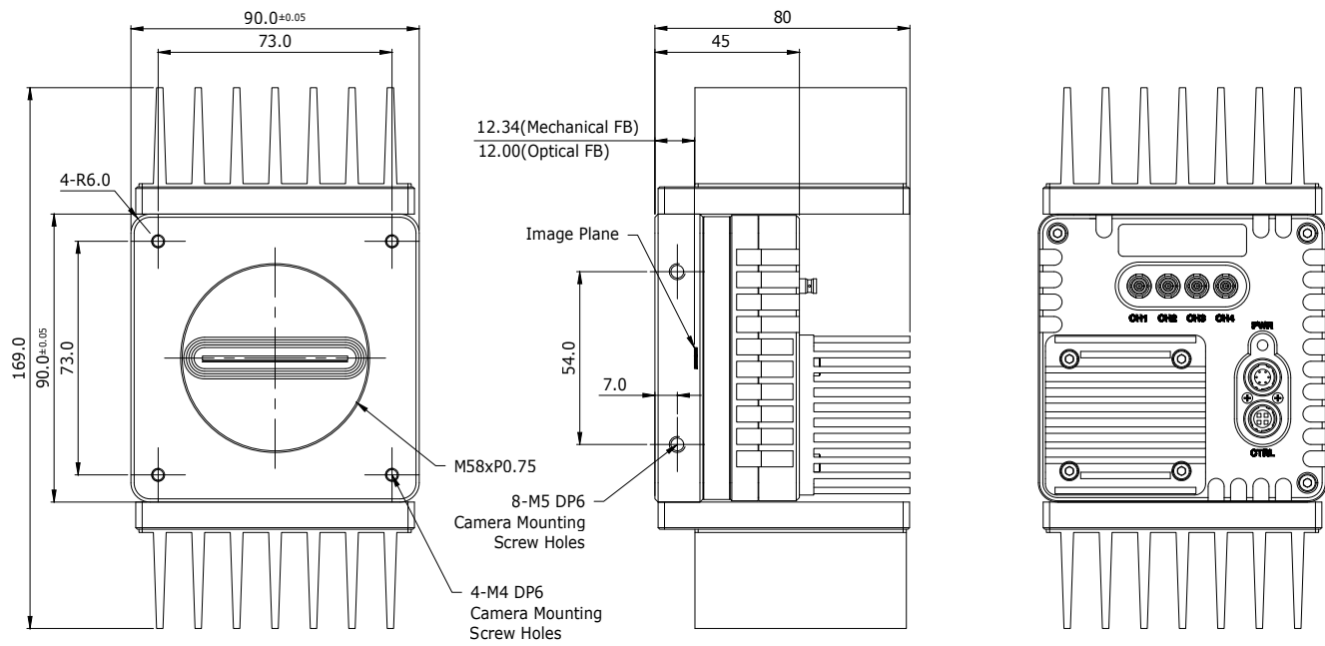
VTS-9K5X2 Mechanical Dimension (with heatsink)
